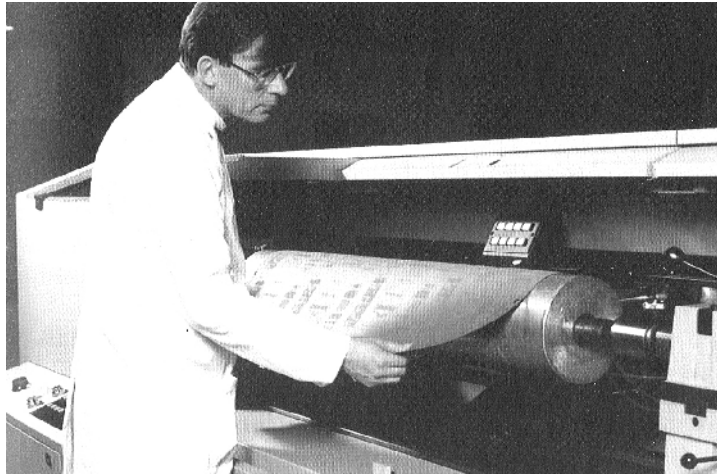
Operator examining a laser-engraved rubber plate.
